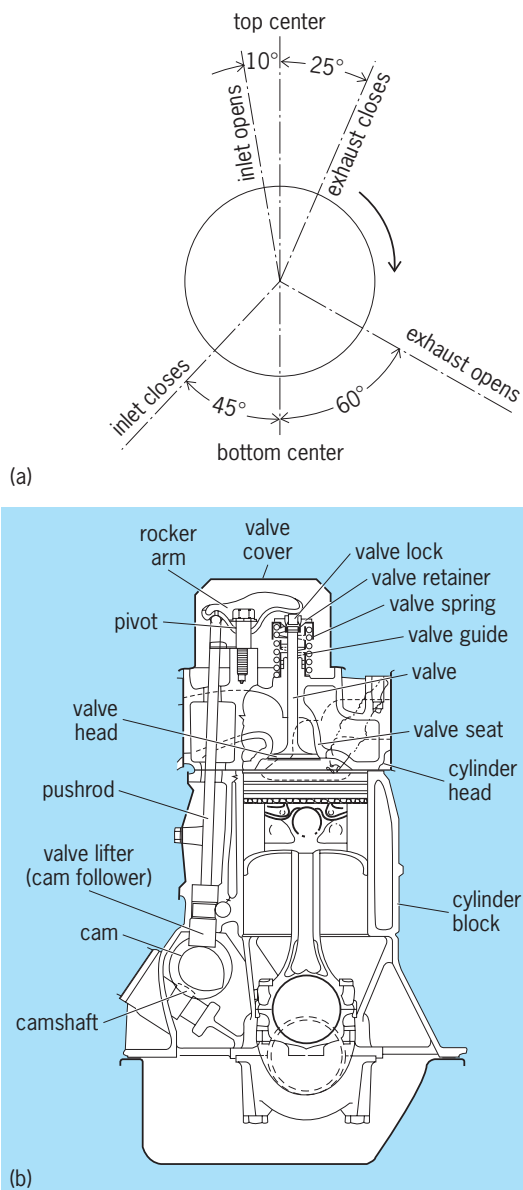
Valve for a four-cycle engine. (a) Valve-timing diagram. (b) Valve train with the camshaft in the cylinder block and the valves in the cylinder head. (Pontiac Division, General Motors Corp.)
